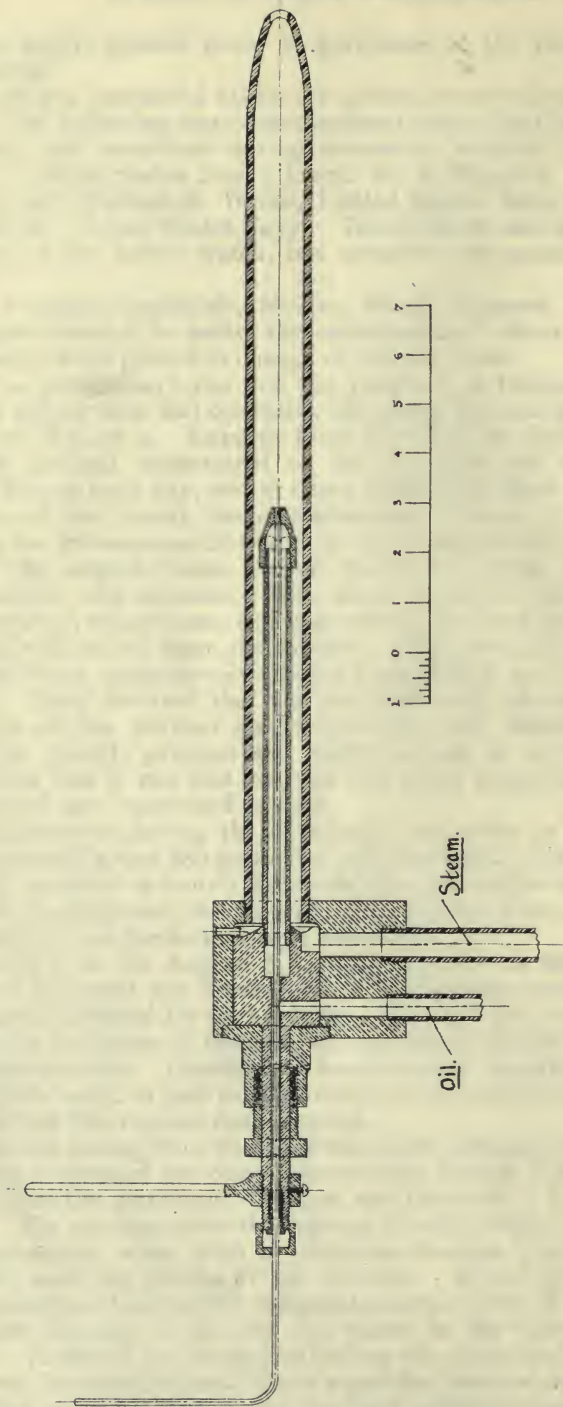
THE HAYES BURNER, USED IN TEST NO. 9.
